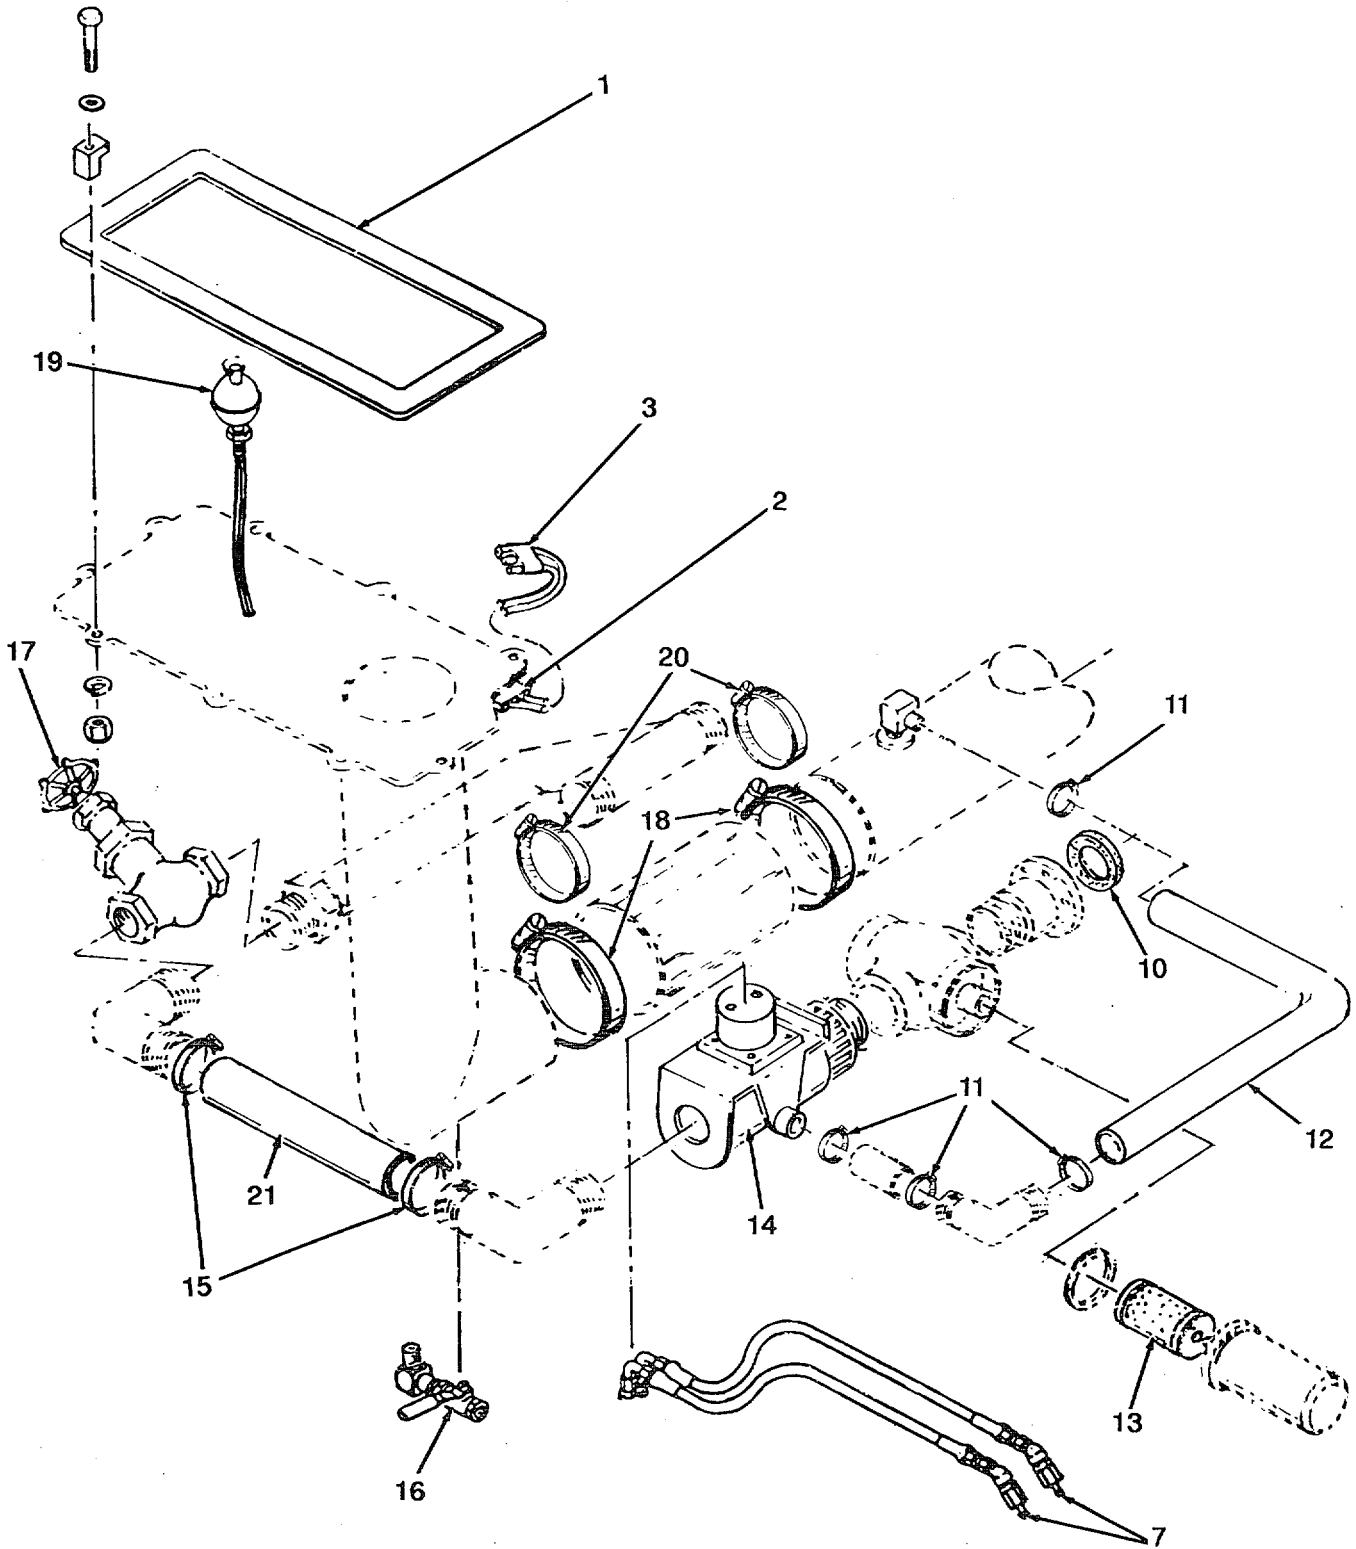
Pump and Crosstube Assembly (Sheet 1 of 2)
